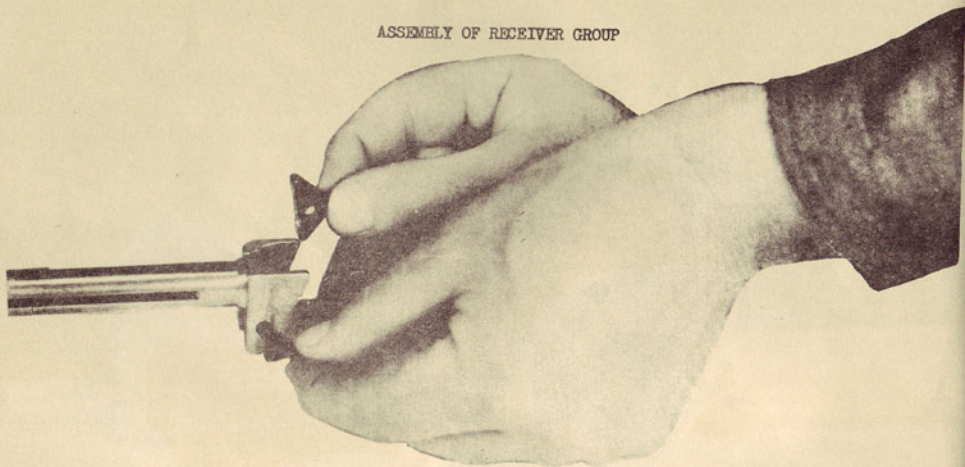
After the EXTRACTOR has been replaced (by sliding it in, lifting the head only enough to clear the stud) insert the FIRING PIN and SPRING in their recess in cylindrical part of BOLT. Place HAMMER in position with rounded edge upward and push HAMMER PIN into place.
